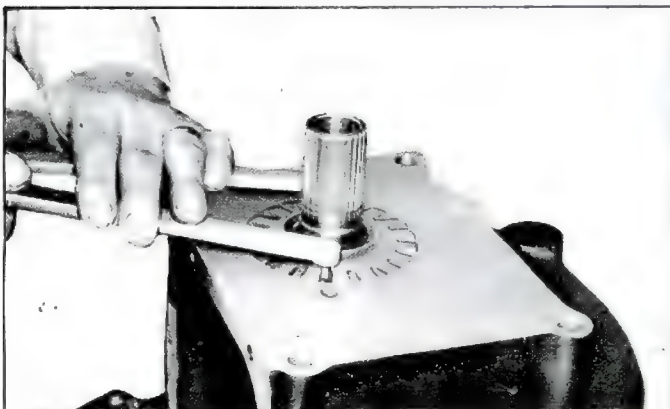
Removing Pinion Adjusting Sleeve with J-972
